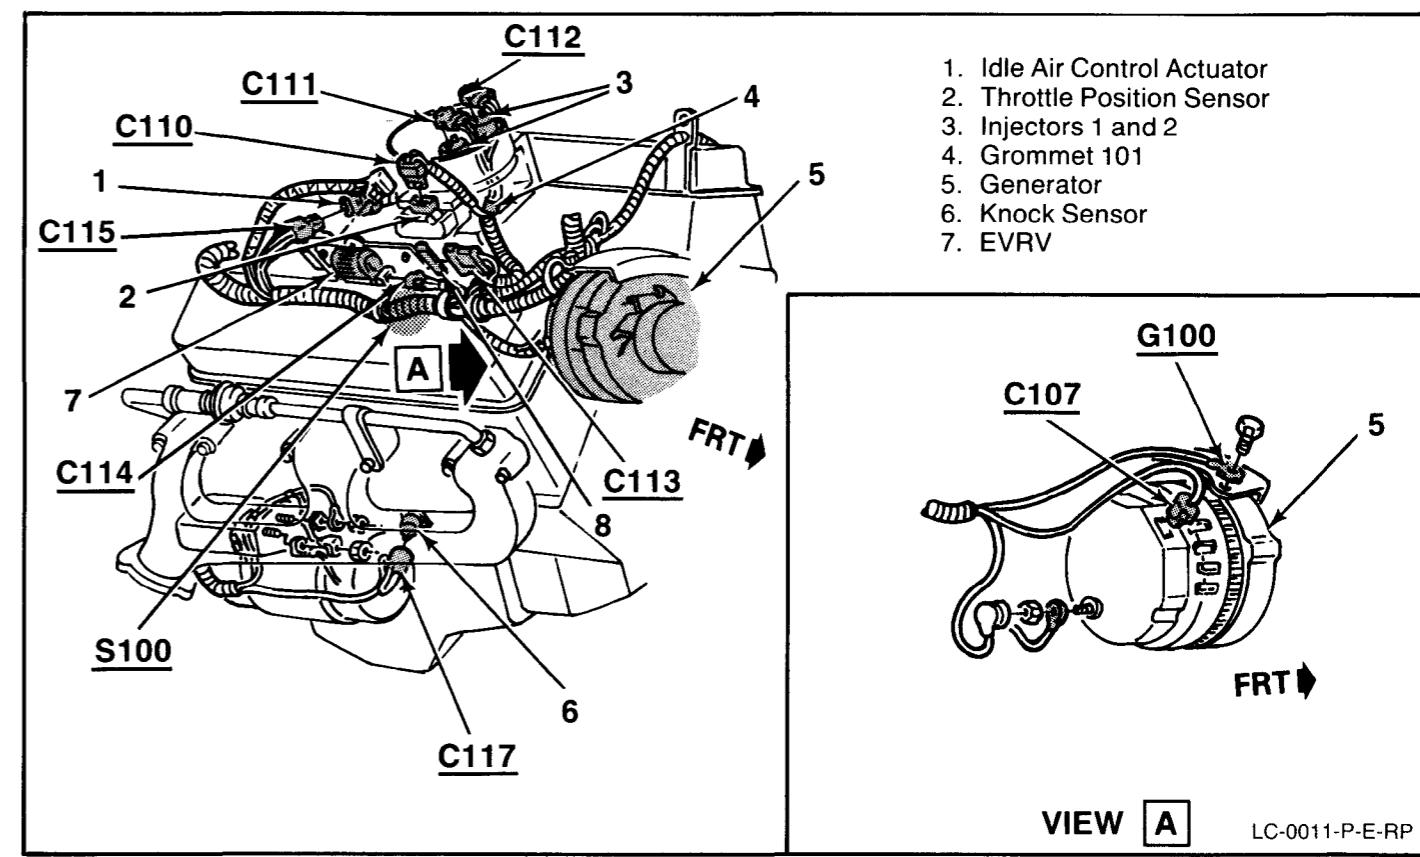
Engine Wiring Harness, RH Side (RPO L05 w/P42)
